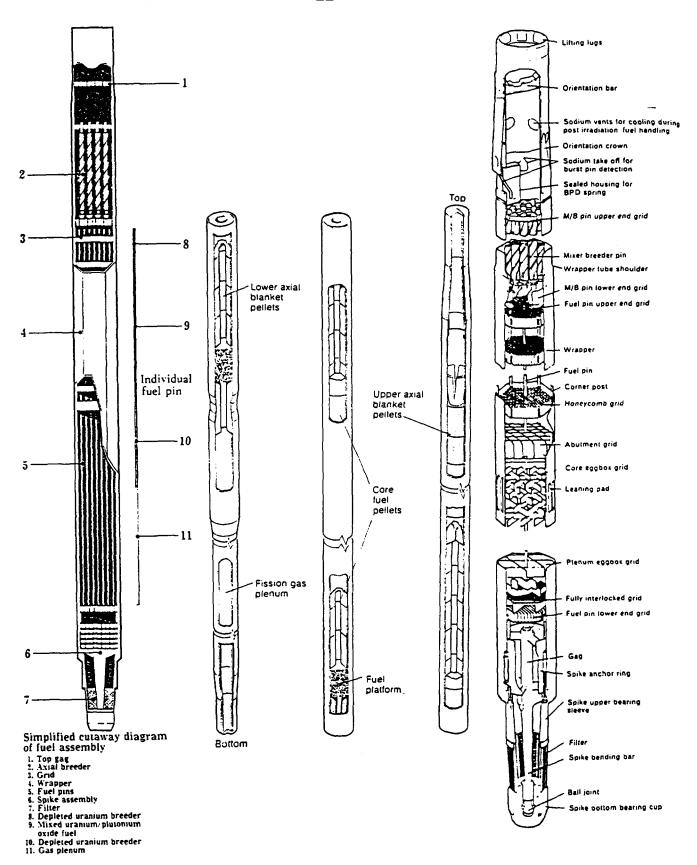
PFR fuel assembly and fuel pin.
